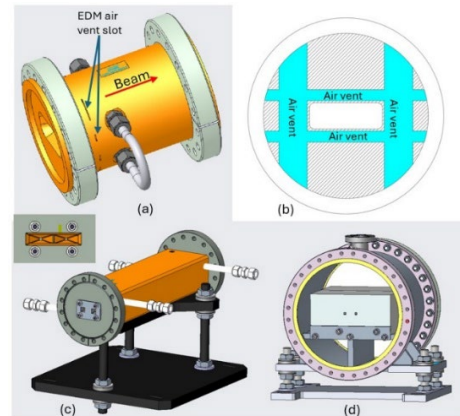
CFU components: a) BTM, b) BTM section view of air vent, c) exit mask, d) exit collimator.
